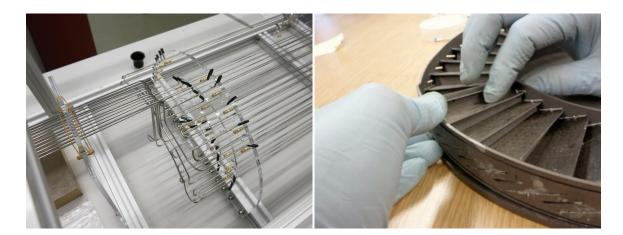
Photographs of the BPIX (left) and FPIX (right) mechanics prototype assembly. The BPIX cooling loops are shown on a temporary fixture without carbon fiber blades. The FPIX cooling tubes (not shown) are mounted in grooves of the rings connecting the TPG blades holding modules.
